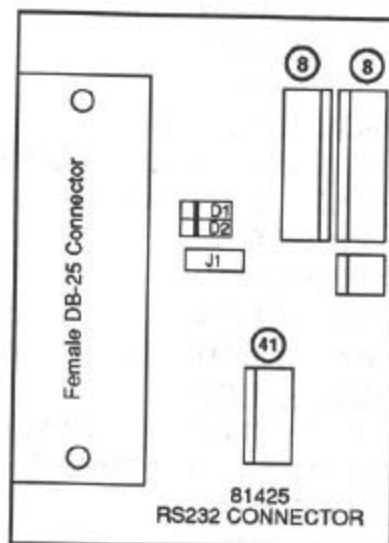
81425 RS232 CONNECTOR BOARD COMPONENT LAYOUT
